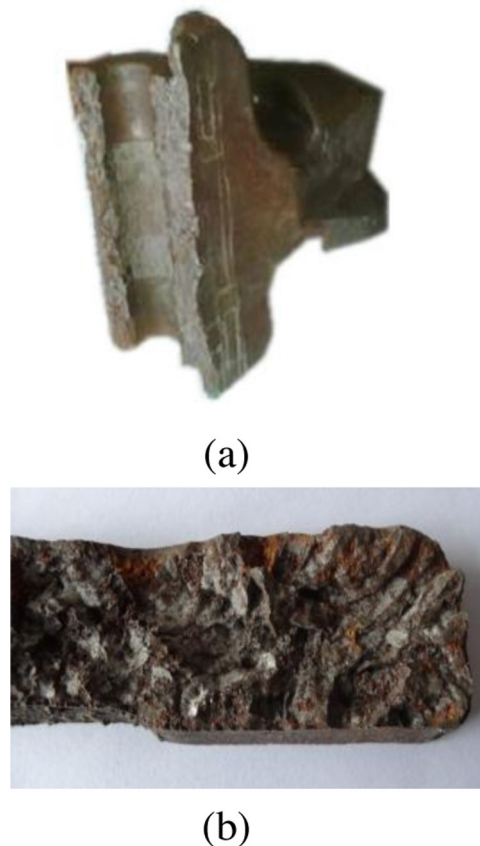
Photographs of failed knuckle (a); the fracture surface of the knuckle (b).
